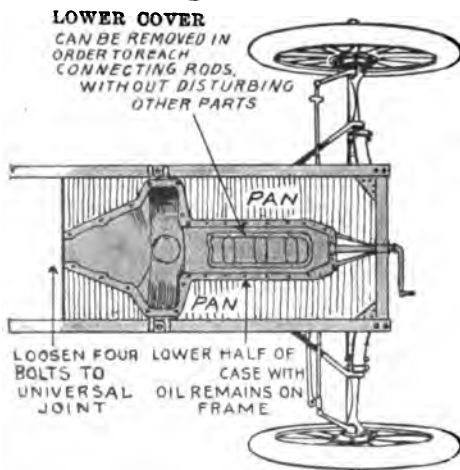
Removing connecting rod and piston: One method of getting at the piston is to take off the cylinder-head, remove the cover from the bottom of the crank case and, by reaching through this, remove the bolts holding the connecting-rod lower bearings in place. After the connecting-rod bearing caps are removed, the piston can be pushed up through the top of the cylinder.
